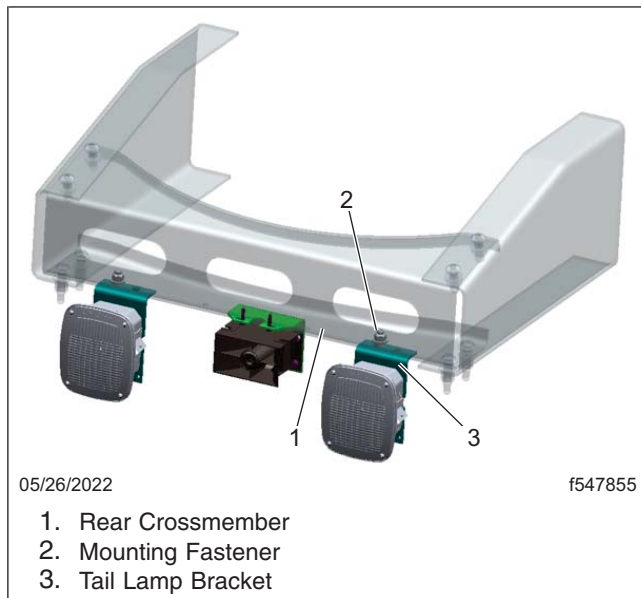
, New Tail Lamp Bracket Installation on the Rear Crossmember
